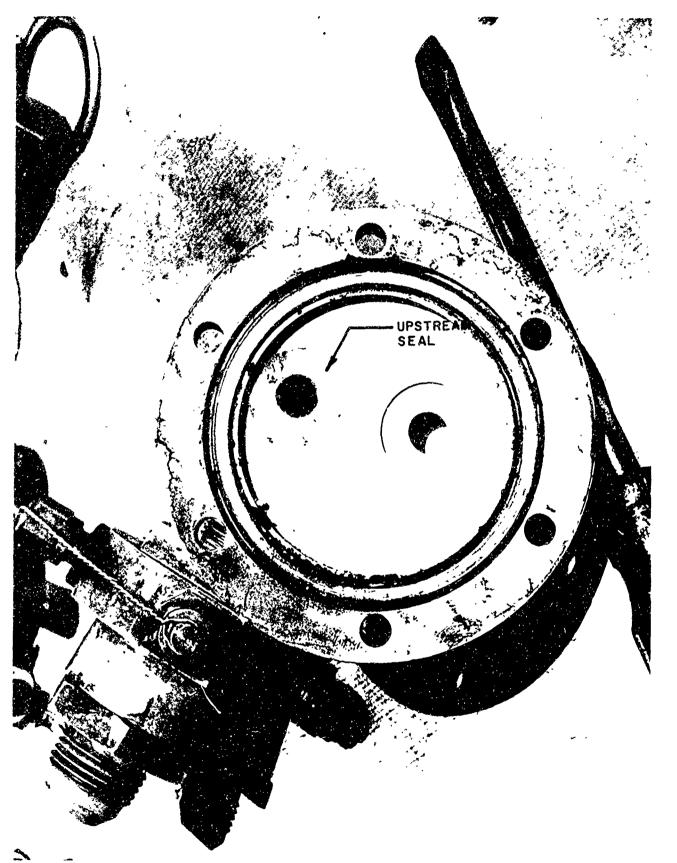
LO2 BLADE VALVE COVER PLATE SHOWING CRACKED UPSTREAM SEAL
